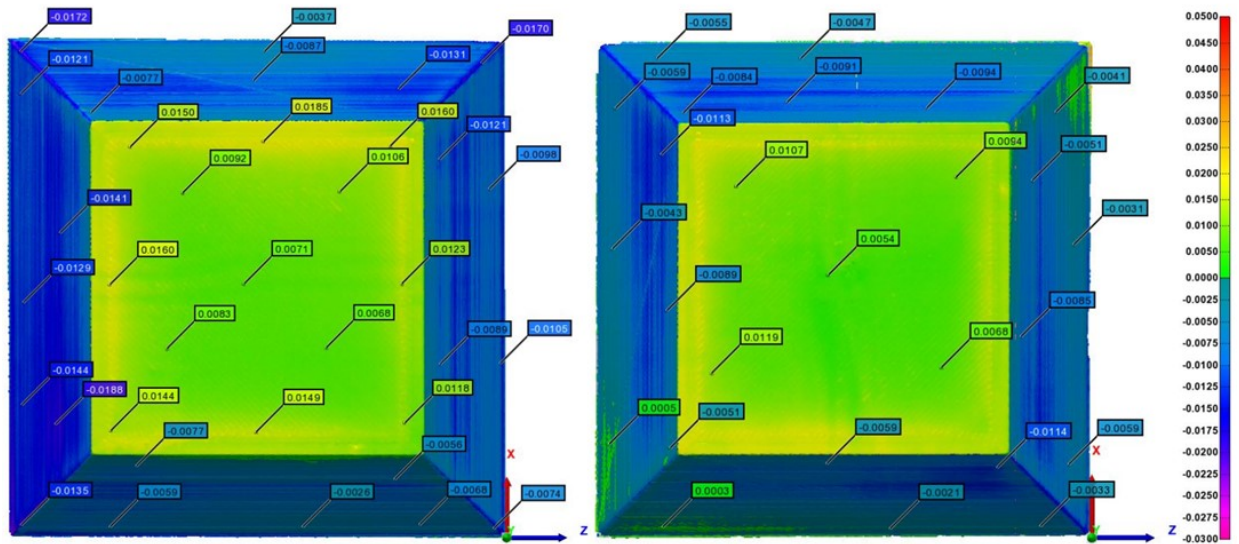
The FaroArm scans show Tool A after manufacturing one composite part (left), and two composite parts (right).
